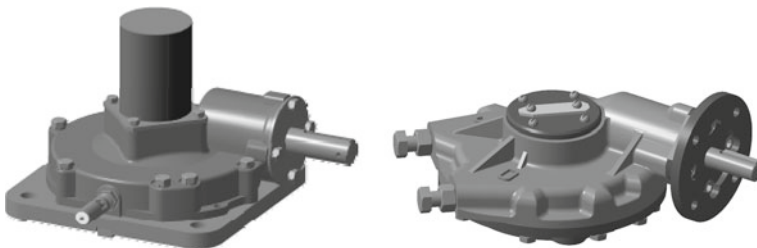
Spiroid gearboxes for pipeline valves—multi-turn (left—for gate valves) and quarter-turn (right—for ball and butterfly valves)
